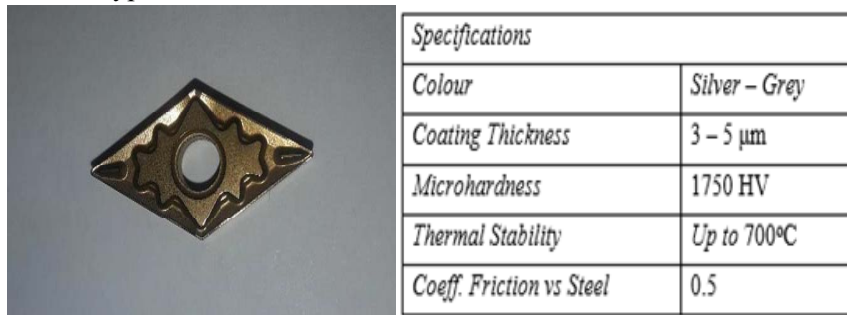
Coated Carbide cutting tool type DNMG 150404 The cutting tool insert is attached to the tool holder
